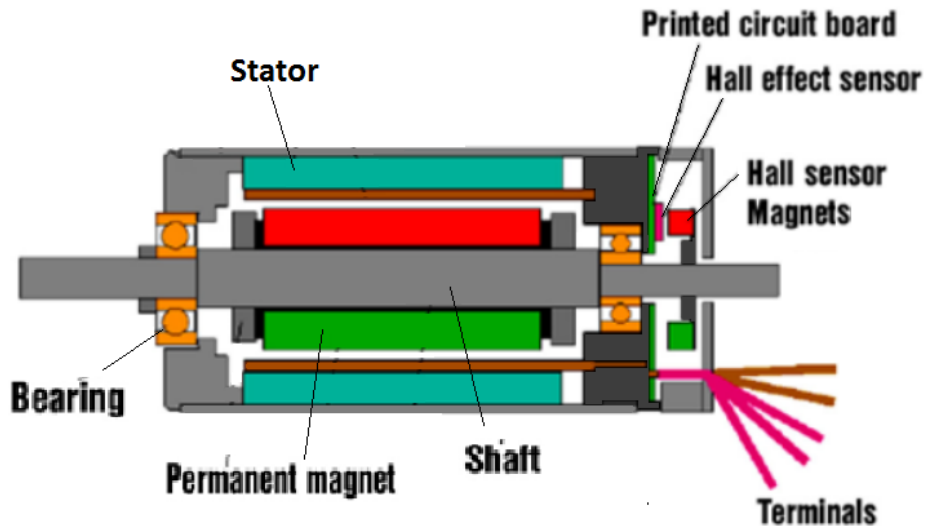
Transverse section of a BLDC motor and Hall sensor magnets mounted on rotor shaft.(modified from [14])
